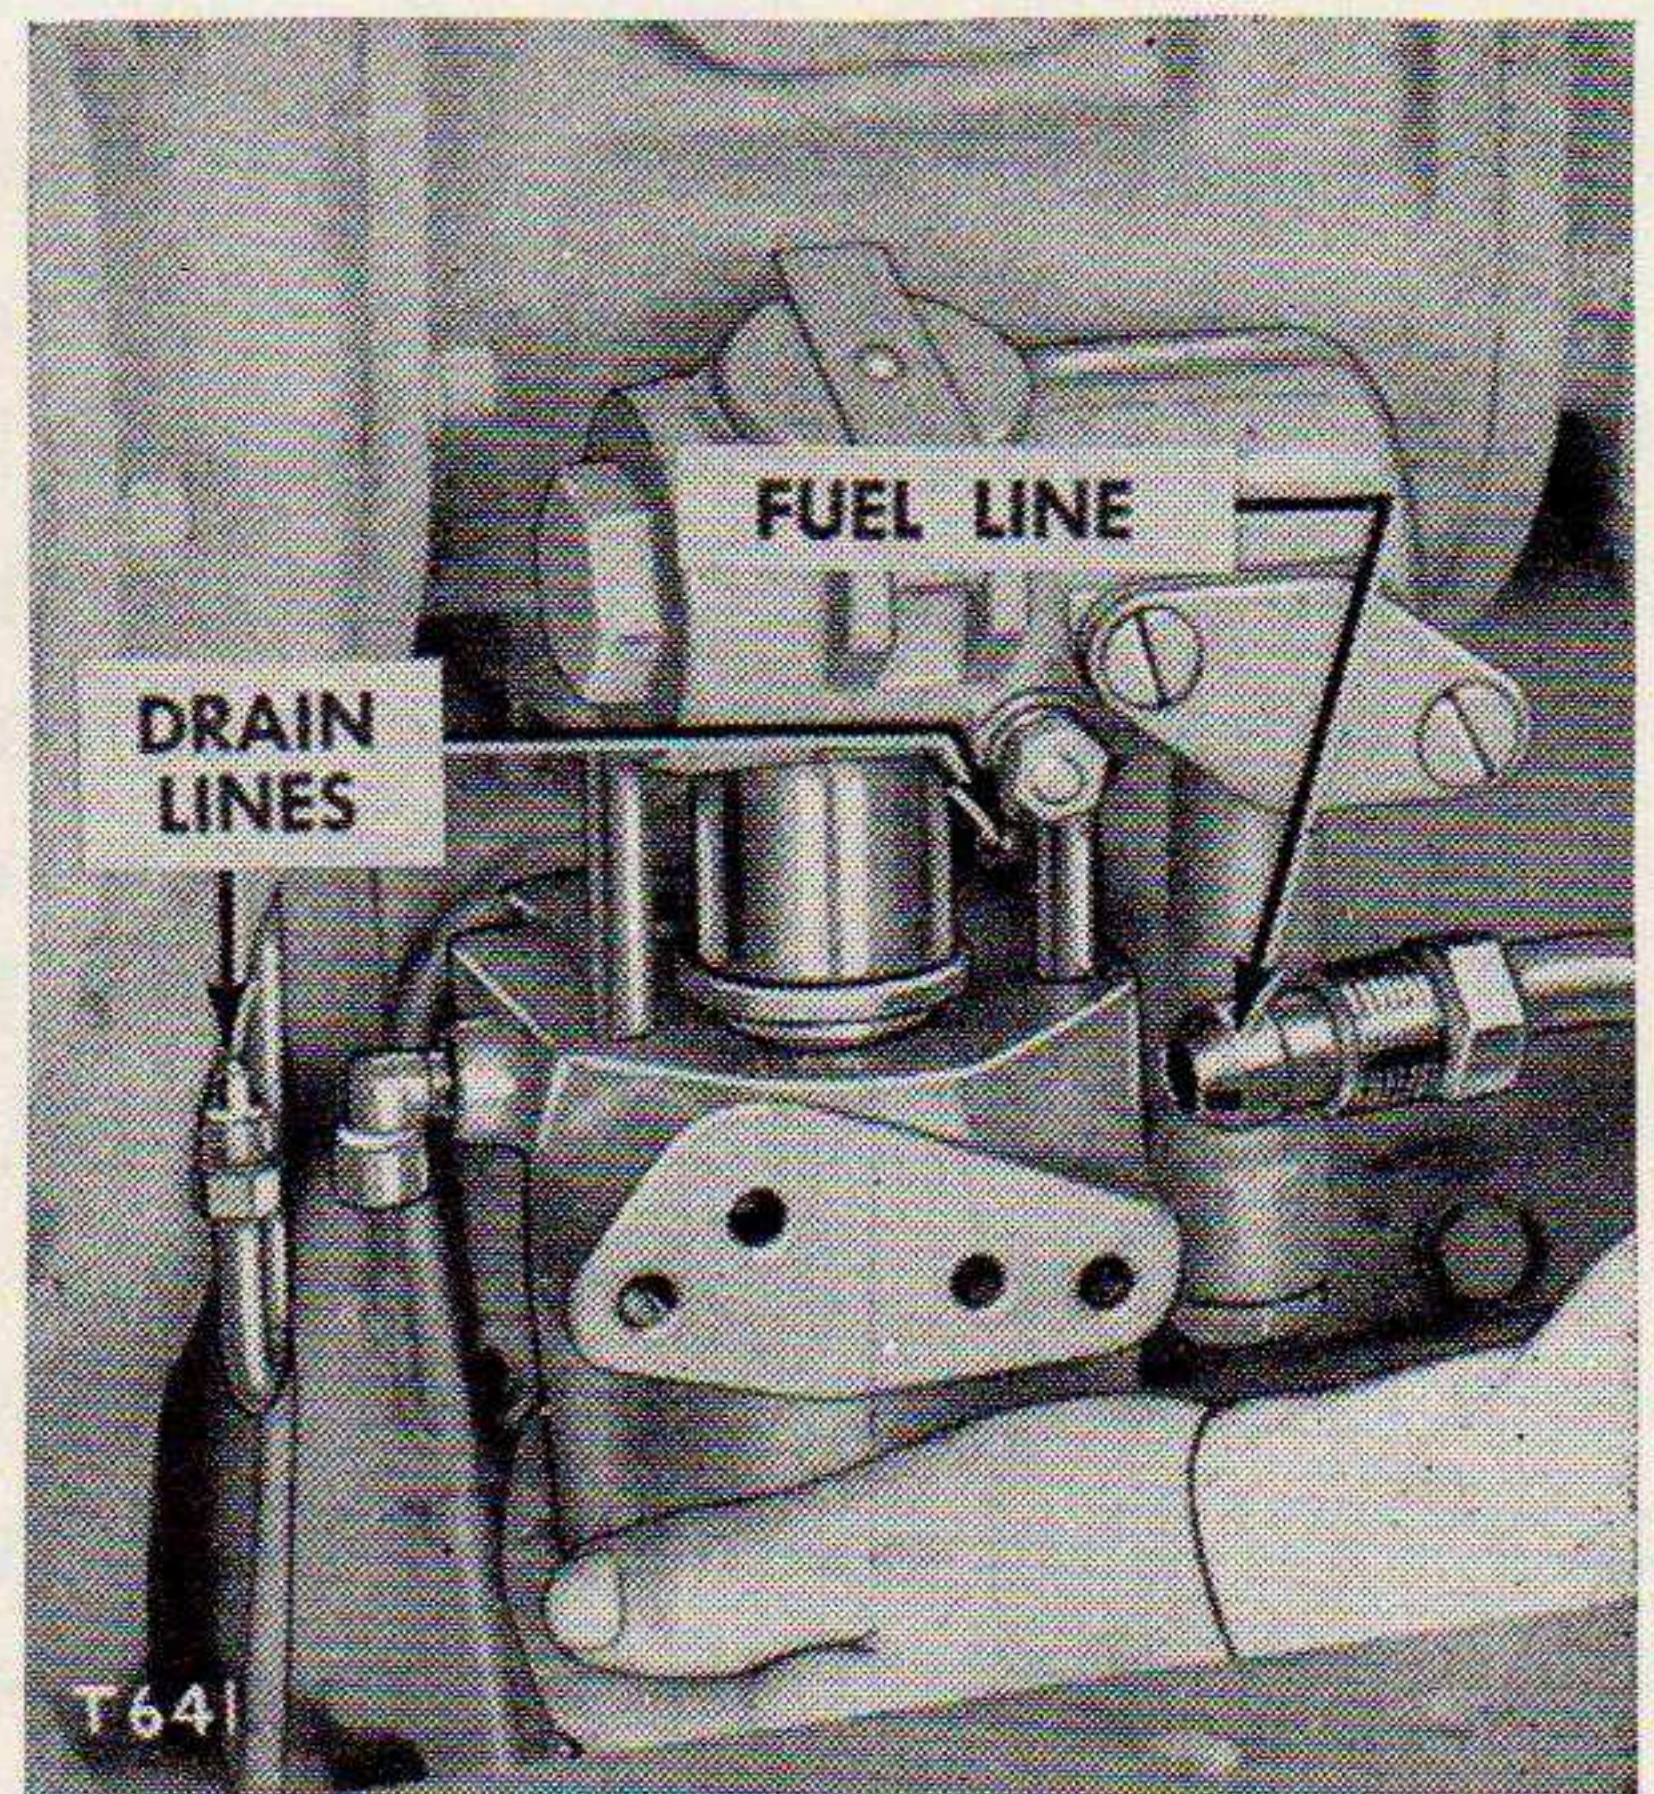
Removing fuel transfer pump (part No. 1F1532).
